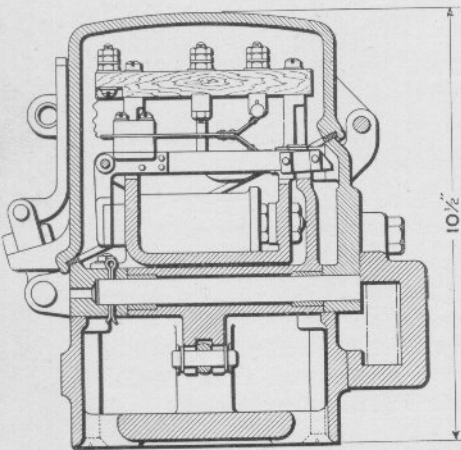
is same as Plate 1116 with the addition of a key release which consists of a Yale Paracentric Lock applied in a position to lift the locking dog by the turning of the key; the latter, however, cannot be removed without reversing it and the lock bolt to the normal position.
